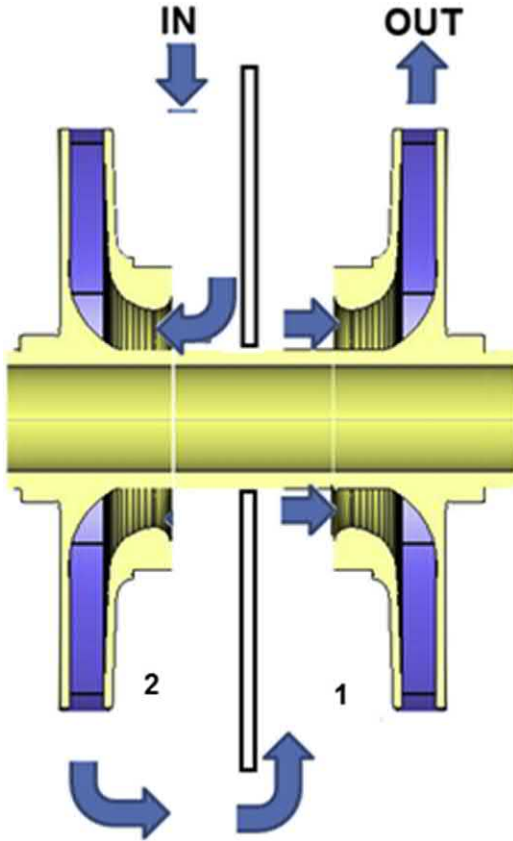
Two stage Front-to-Front impeller rotor.
